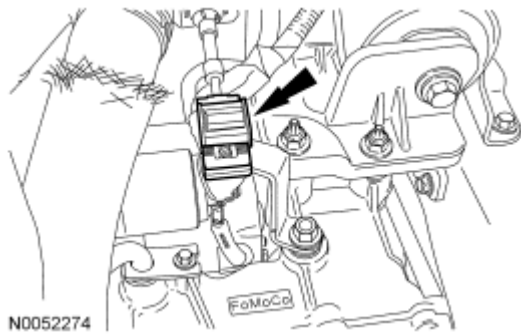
Locating Selector Lever Cable End From Manual Lever
